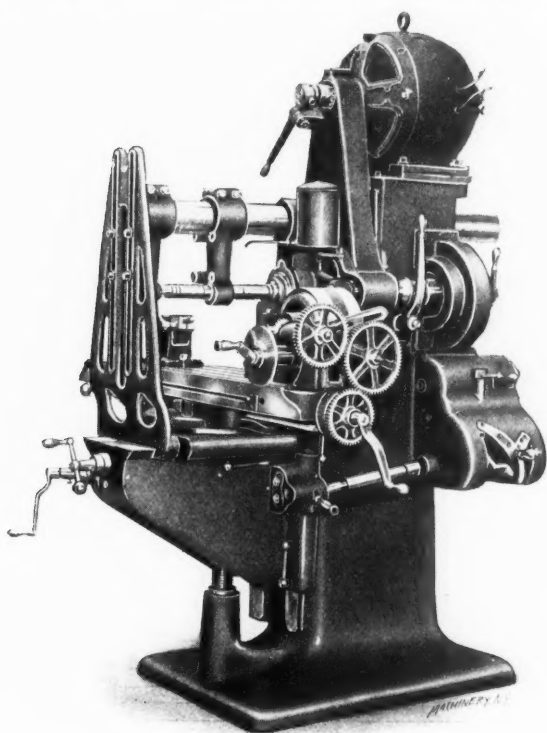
Variable Speed Motor Drive for Milling Machine.
